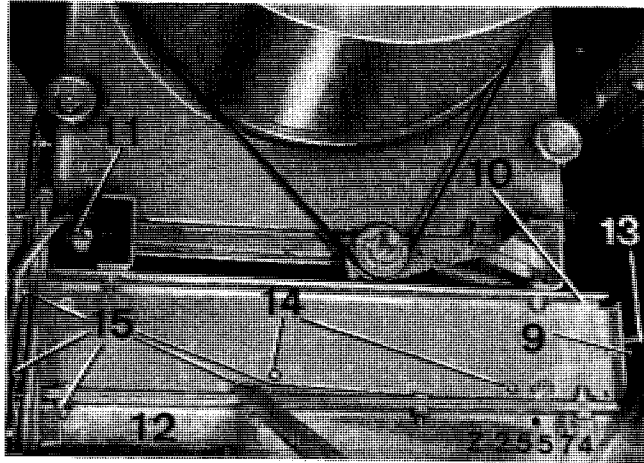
Removing Right-Hand Engine Mounting Bracket
